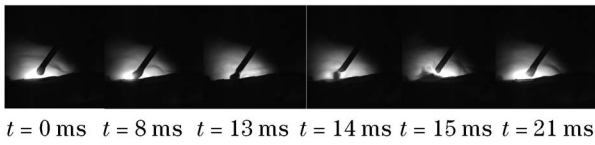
Droplet detachment of the pure MIG welding. $I = 150$ A.
